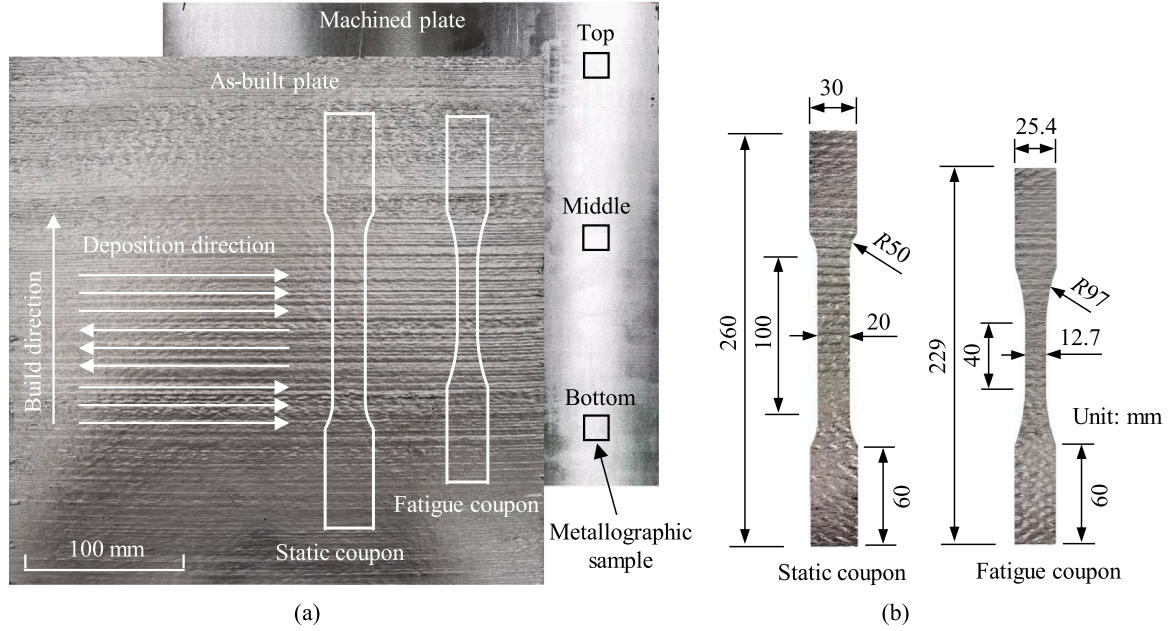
(a) As-built and machined plates, deposition strategy of WAAM plates and extraction of coupons and metallographic samples; (b) typical static and fatigue as-built coupons and their nominal dimensions.
